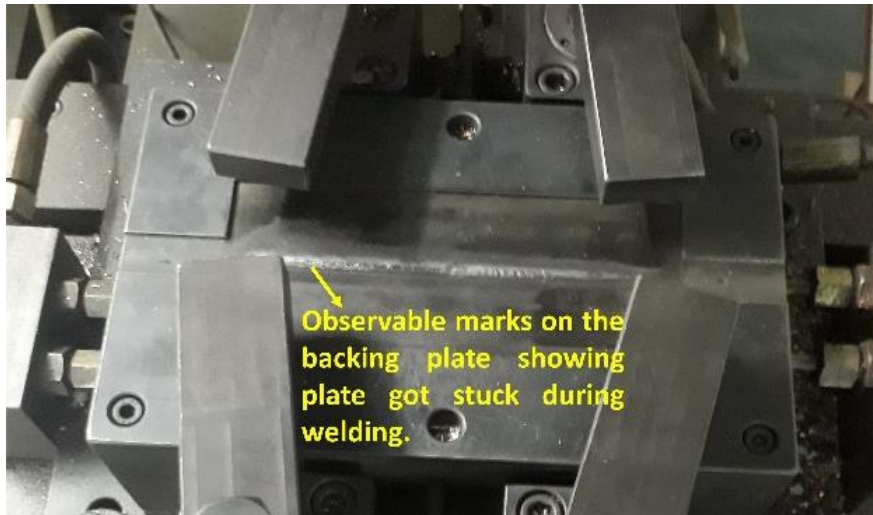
Defect due to large pin and regular shoulder diameter
